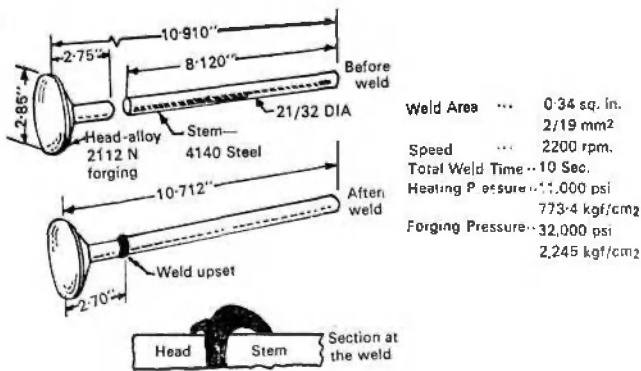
Diesel Engine Exhaust made by friction welding a heat resistant alloy forged head to a low alloy steel stem.
